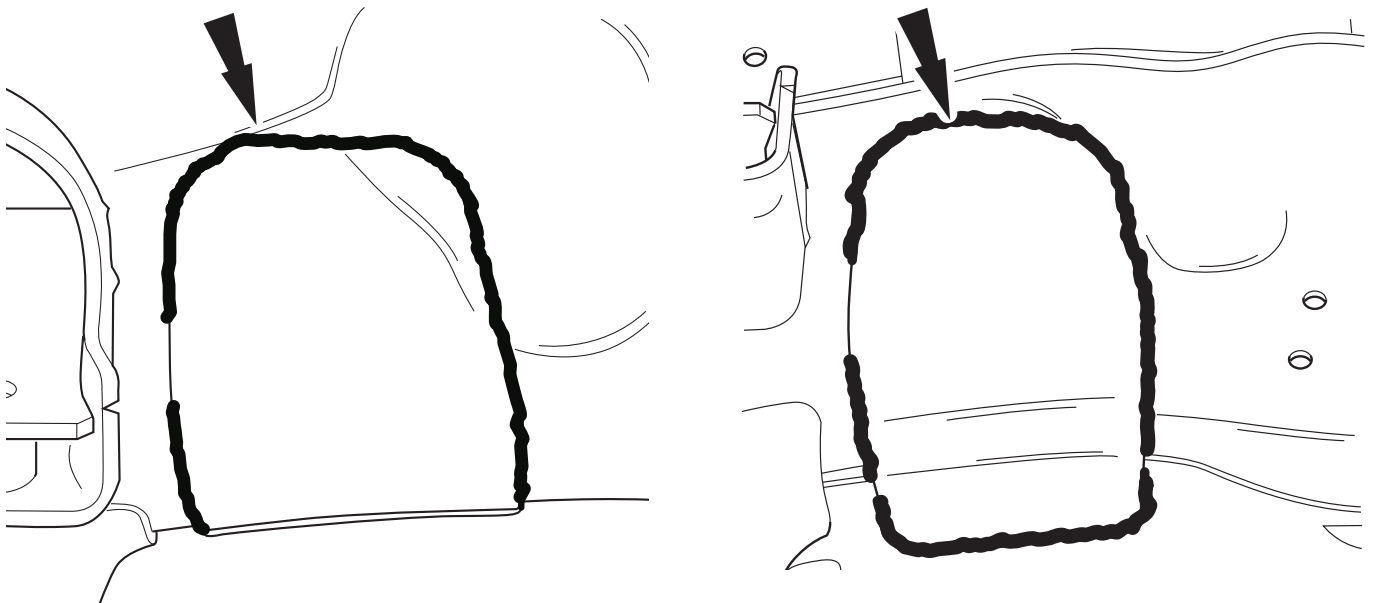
VIEW OF REINFORCEMENT PLATE ASSEMBLED TO THE FRAME RAIL SHOWING THE WELD PATTERN REQUIRED
